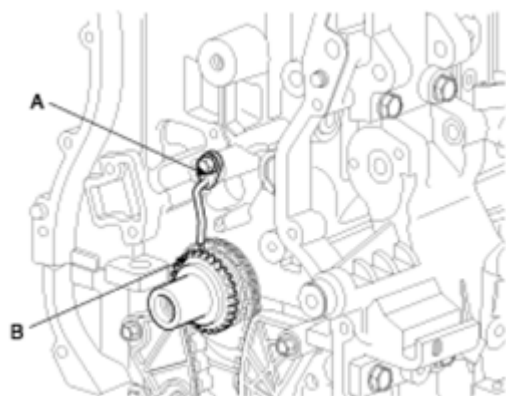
Identifying Crankshaft Sprocket & Timing Chain Oil Jet
